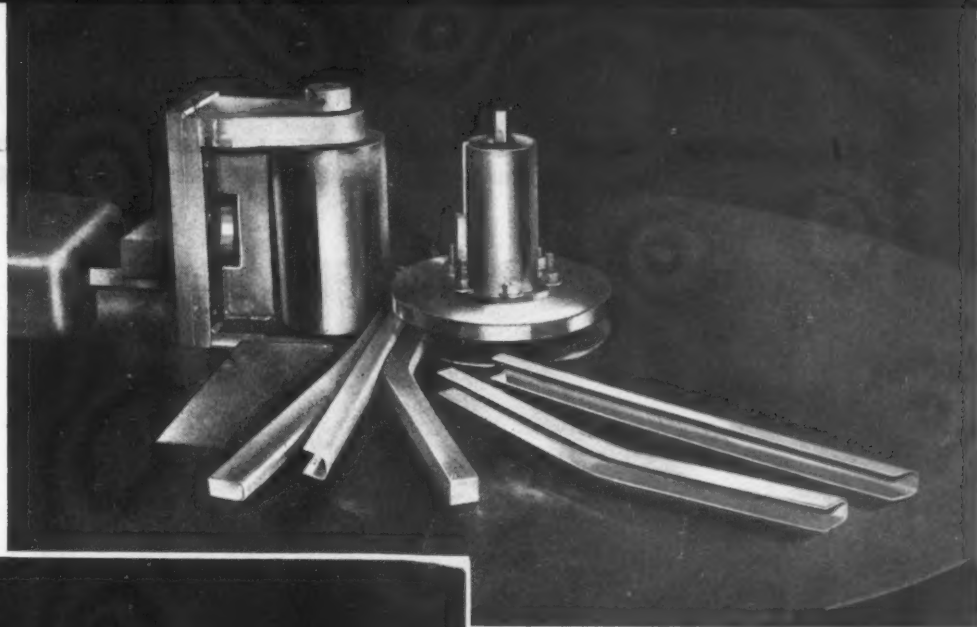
Wrap Forming Machine Equipped for Bar Forming Operations by the Use of a Spring-loaded Driving Roll on Table and a Pressure Roll on Ram
